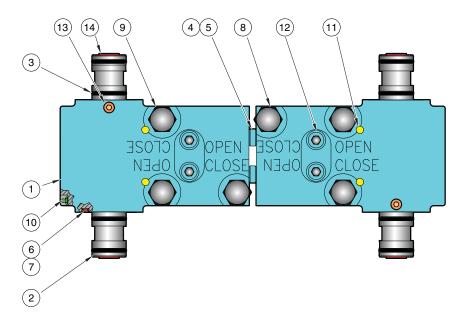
Hinge Bracket Assembly 7-10/15M
